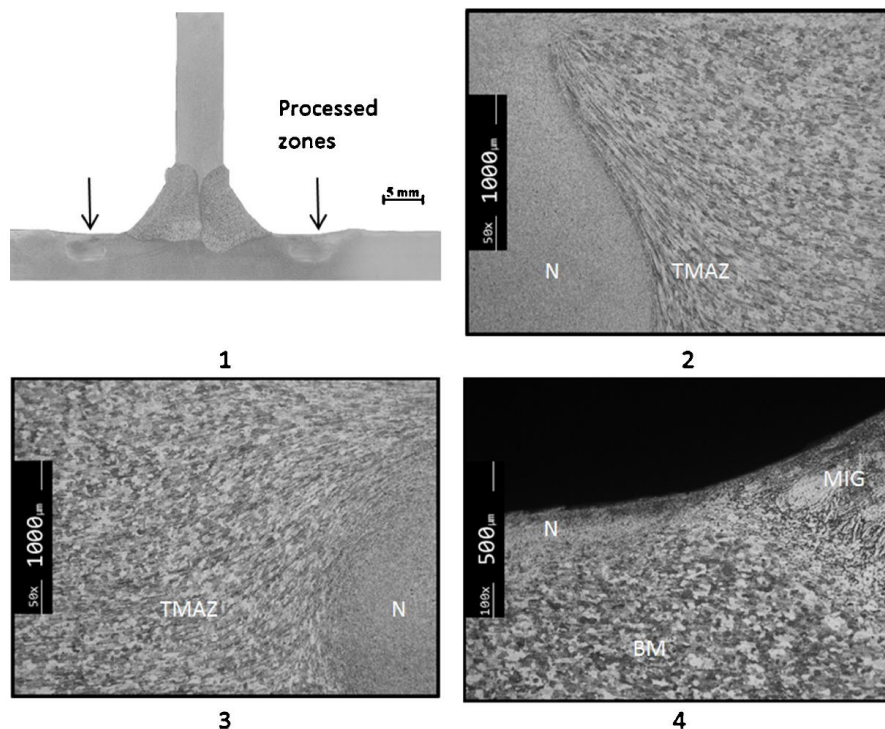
MIG welds made on AA 5083-H111 and processed with tool D: (1) macrograph; (2) advancing side of stir zone; (3) retreating side of stir zone; (4) toe region.
